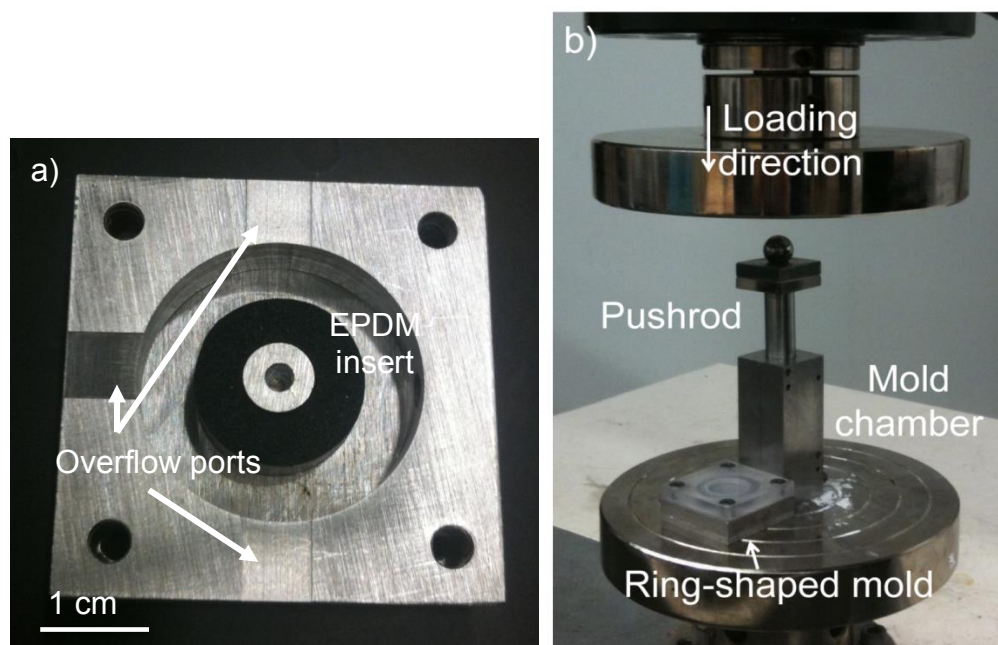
a) Ring-shaped mold with EPDM foam centerpiece and three escape ports adjacent and across from the injection port. b) The injection mold setup between two compression platens of the load frame prior to the injection molding operation. A pneumatic vibrator with dimensions of 5.5 cm \times 1.6 cm \times 2.3 cm was fixed on top of the ring-shaped mold using cable ties (not pictured) during forming.
